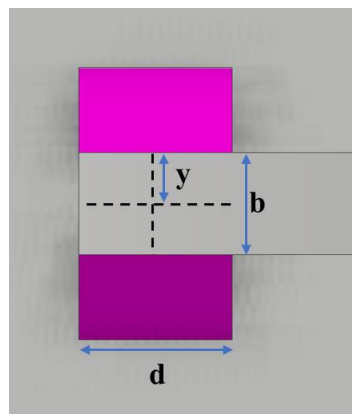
Dimensioning of the welds for vertical component calculation.
